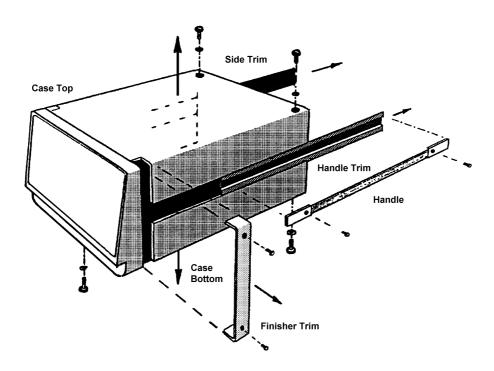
Removal of trims, handle, and top and bottom cases
